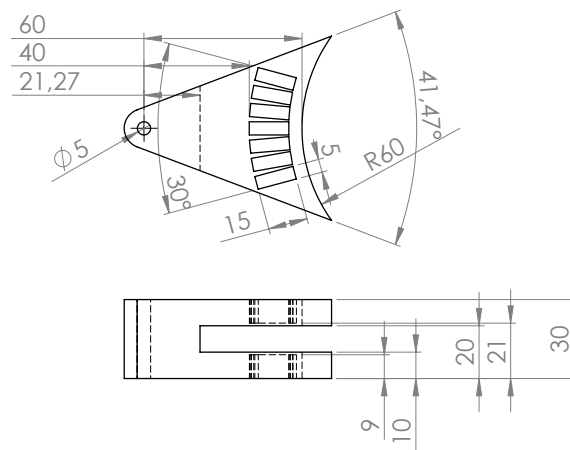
Dimensions of the internal part of attractive moment-arm design. Dimensions in mm.
